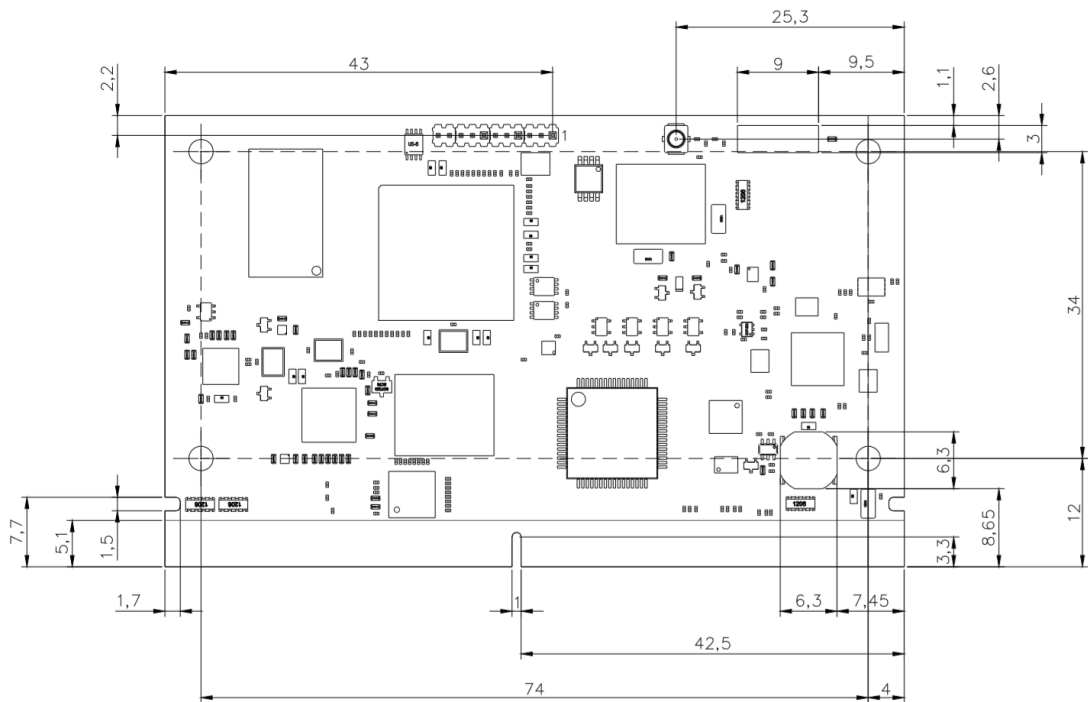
SMARC AM335x Side view detailed mechanical dimension
